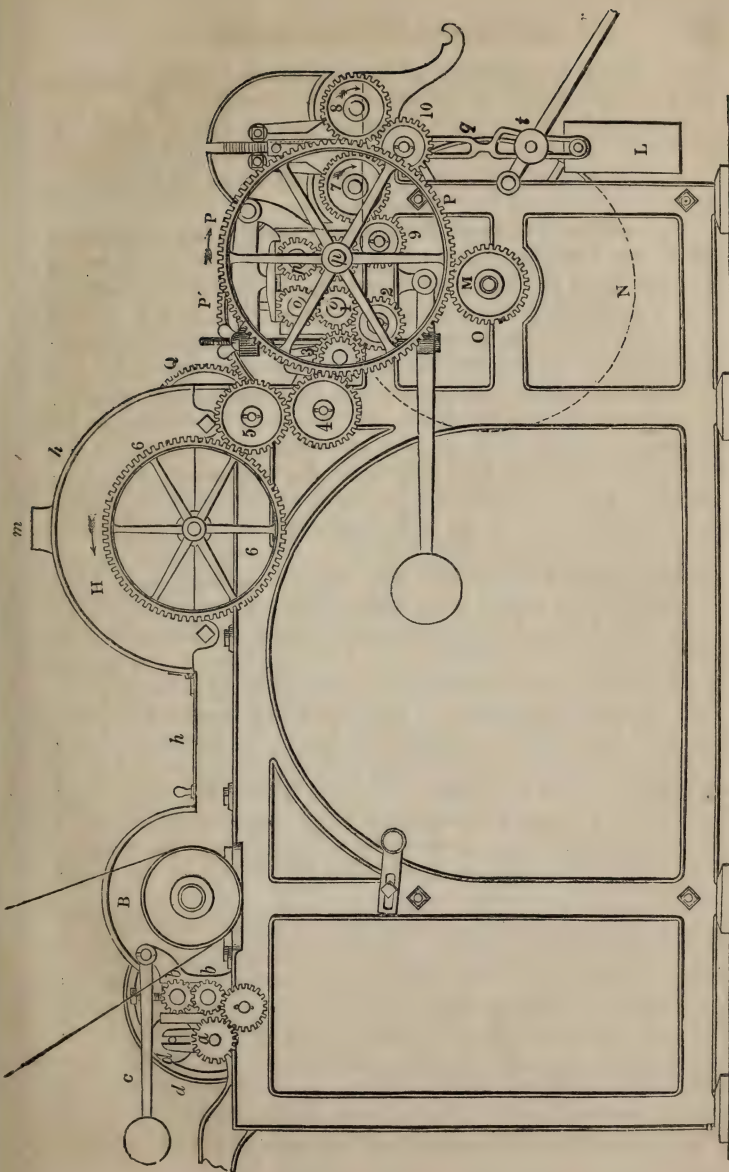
A Longitudinal View of the outside of the Lap Machine to show the moving mechanism.
